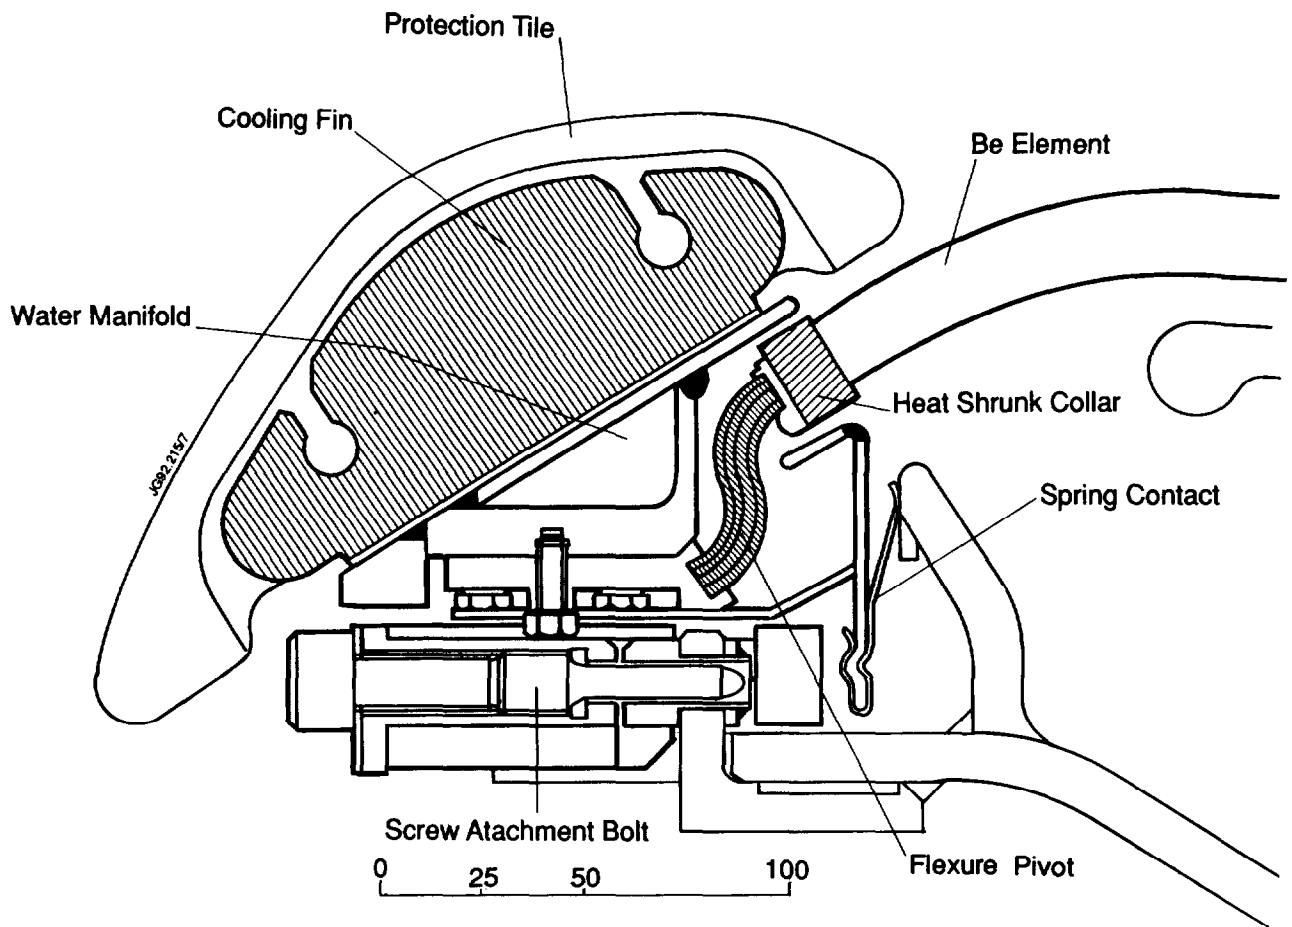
A detailed section of the attachment of the beryllium elements to the water manifold and the housing. The flexure pivot comprises 16 foils welded into end fittings.
